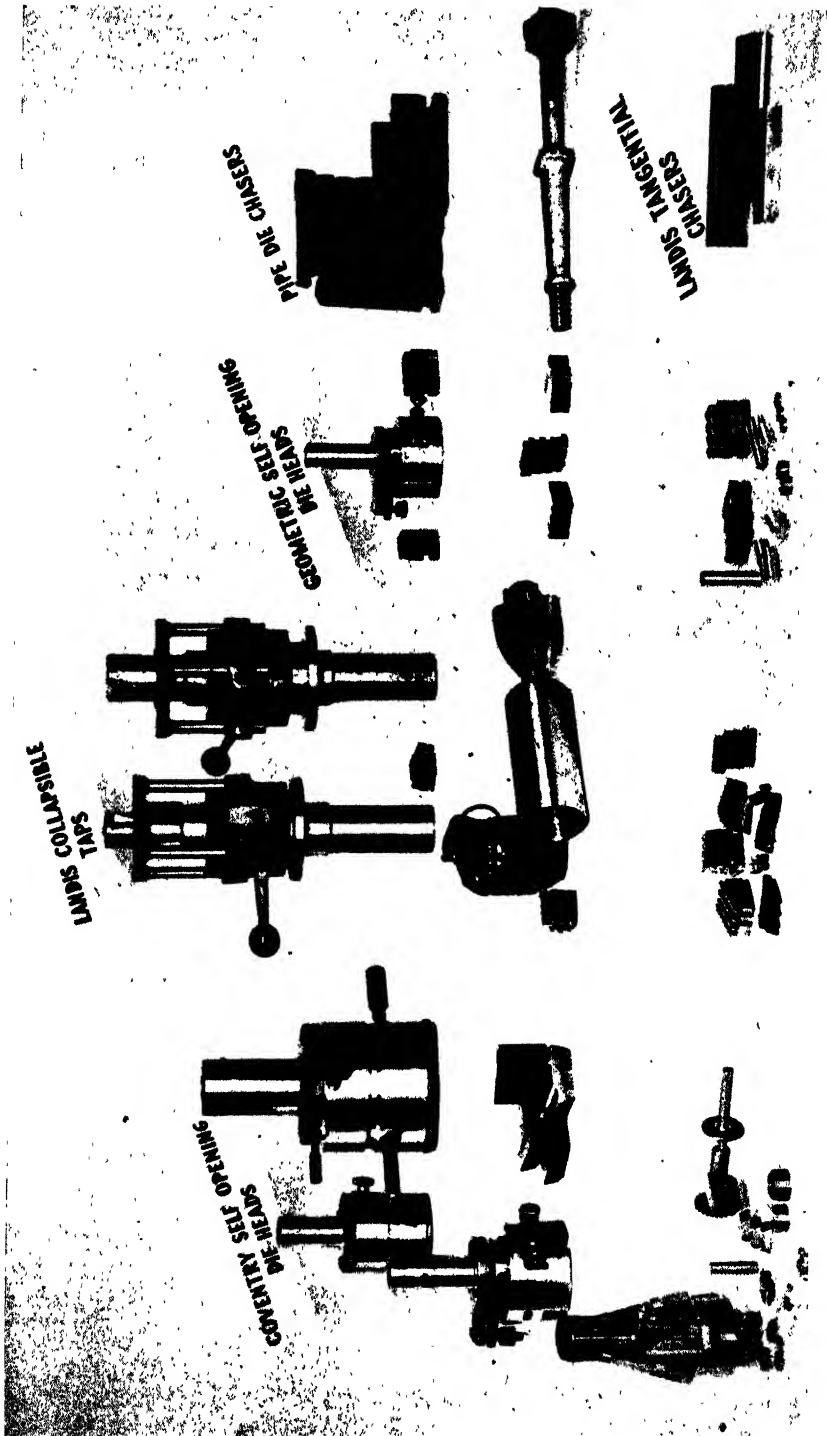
Precision chasers, die-heads and taps, and threaded components they produce.
